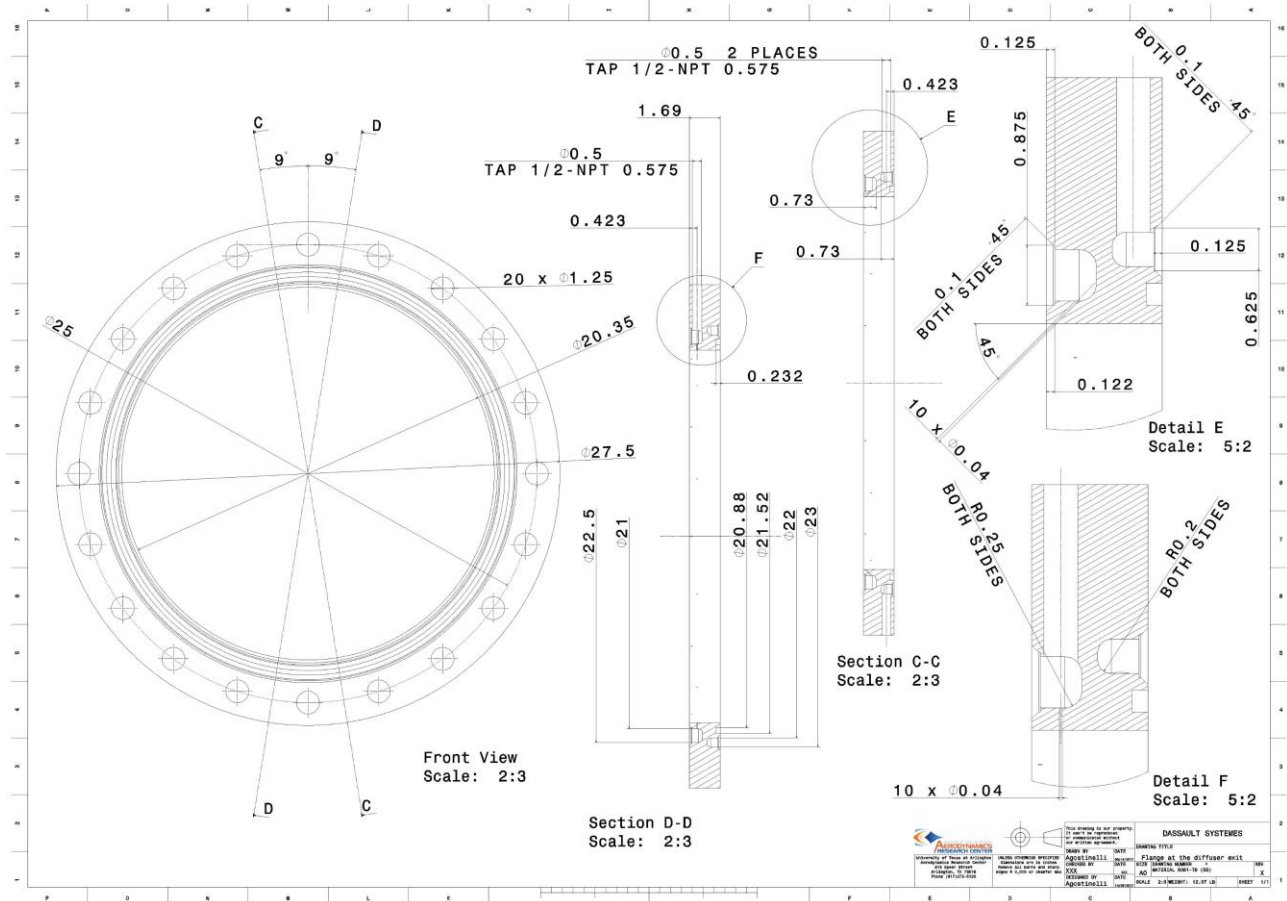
Design Proposal for the emergency flange (2D CATIA technical drawing)
